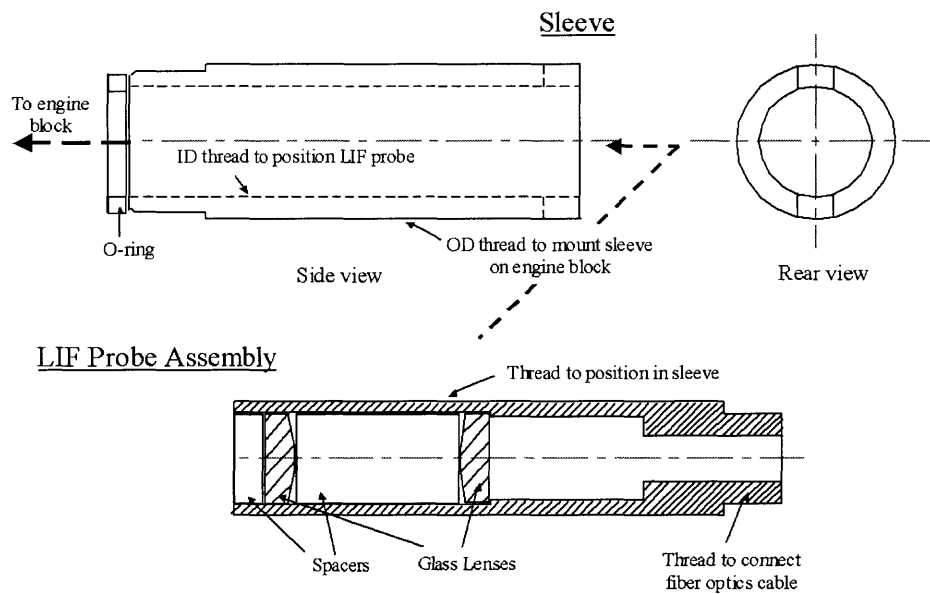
Arrangement of LIF housing sleeve and probe assembly
